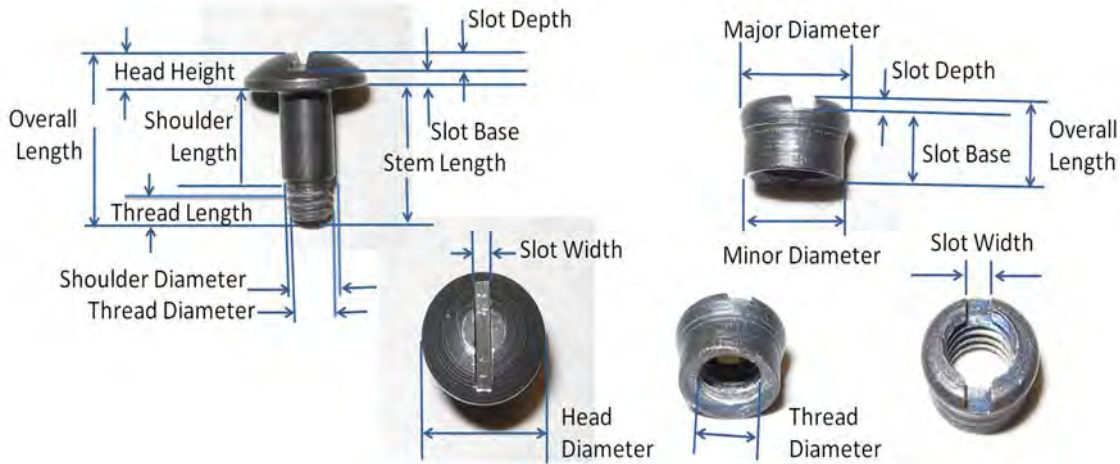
Definitions of screw and nut dimensions listed in Table II.
